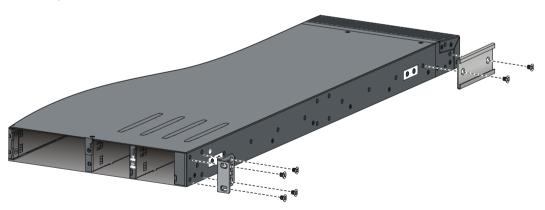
Attaching the mounting brackets and chassis rails to the HPE 5930-2Slot+2QSFP+/HPE 5930-2Slot+2QSFP+ TAA switch (power supply-side mounting position for the mounting brackets)
